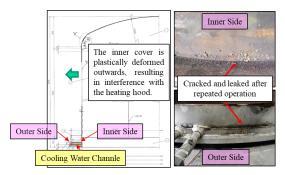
The rupture of the weld bead in the cooling water channel.
